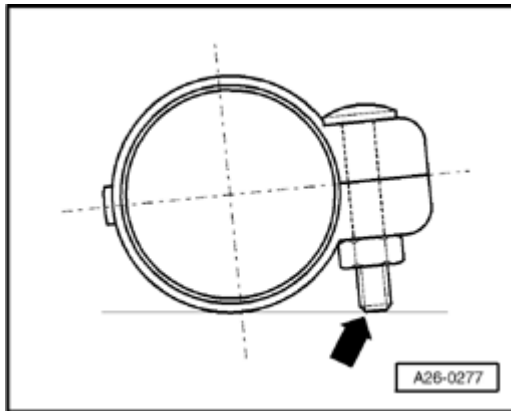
Identifying End Of Bolt Does Not Project Below The Bottom Of Clamp
